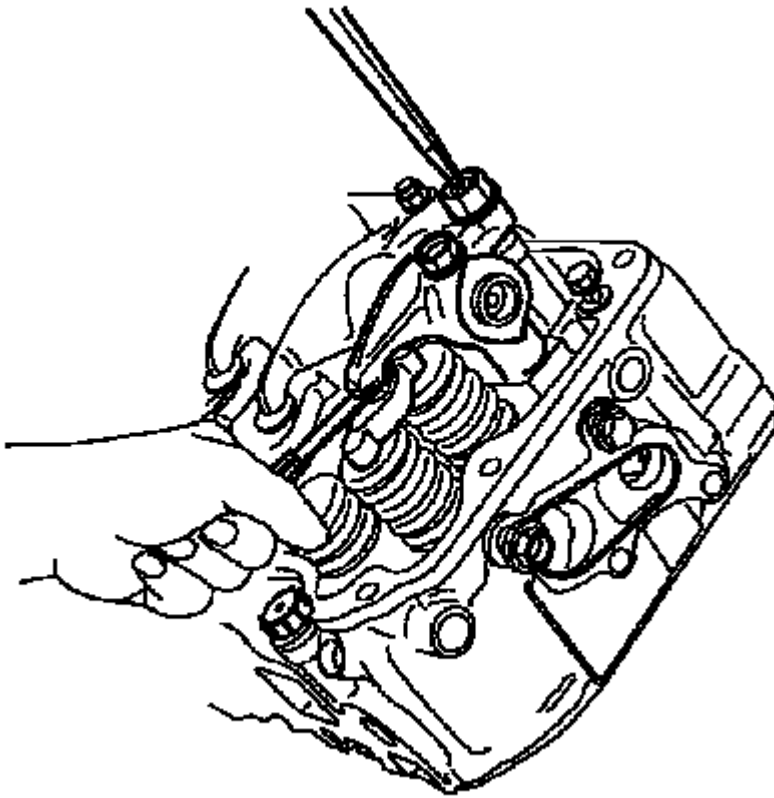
View Of Feeler Gage Between Tip Of Rocker Arm & Valve Lifter Bridge
